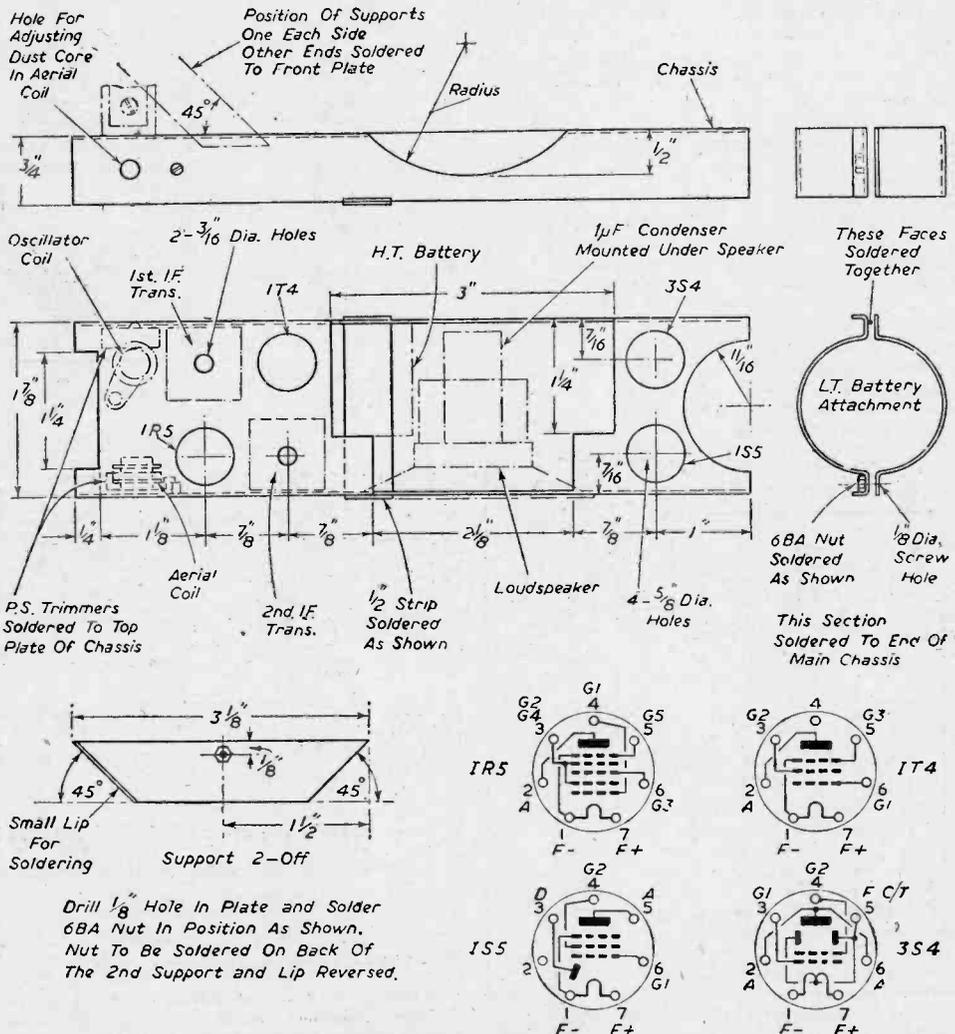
Cutting and drilling details of the chassis, and valve-base connections.
